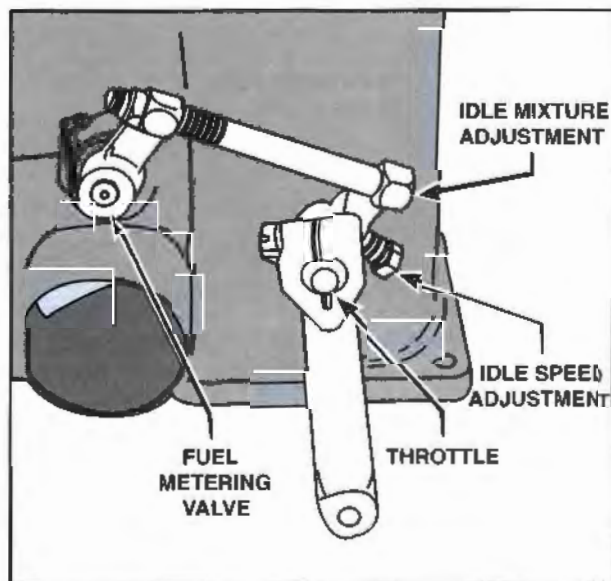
Idle speed on a Teledyne Continental Motors fuel injection unit is adjusted by a spring-loaded adjustment screw. Idle mixture is adjusted by changing the length of the connecting rod between the control arms of the metering and the throttle valves.
